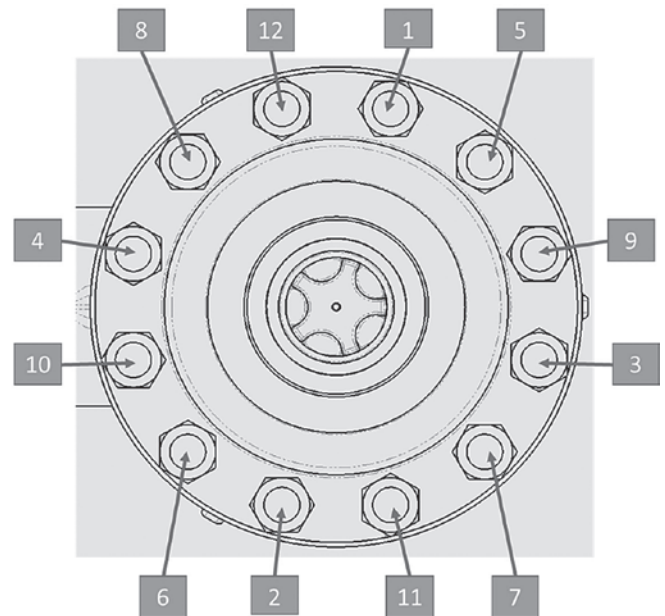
Torque Sequence Single Bolting Circle 12 Bolts
